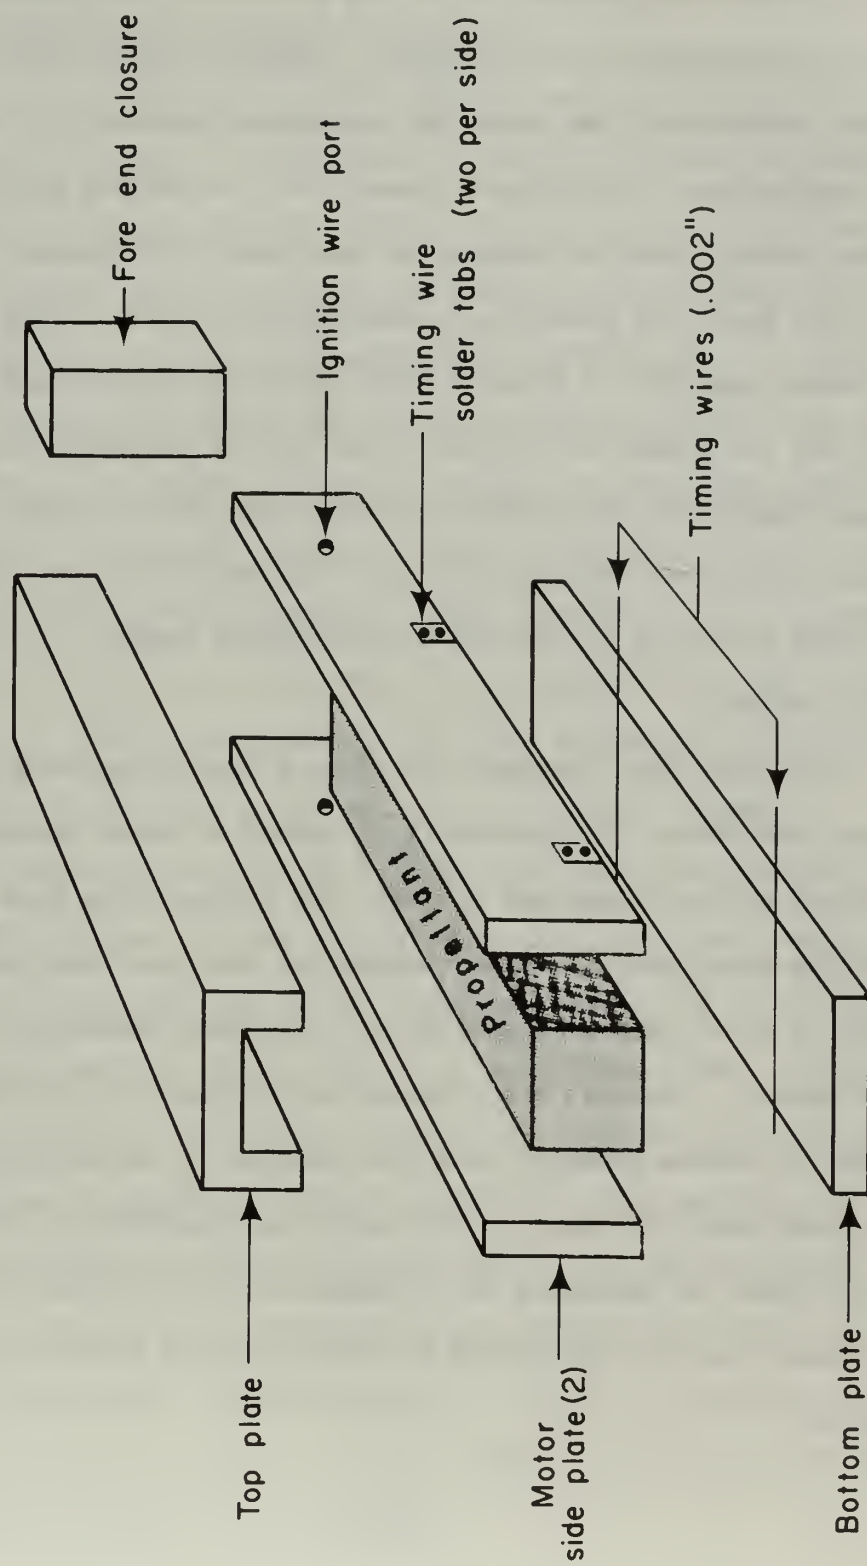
MOTOR USED IN EROSION BURNING EXPERIMENT
